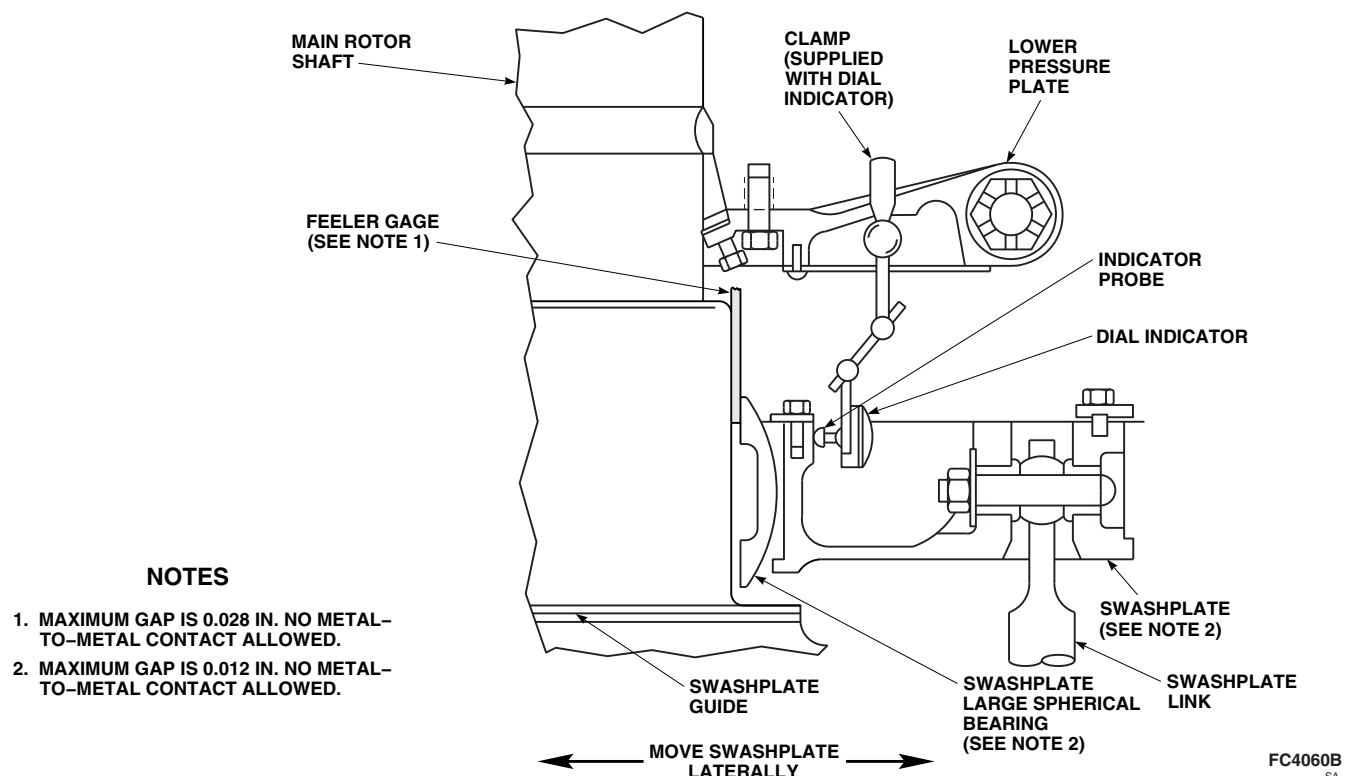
INSPECT SWASHPLATE LARGE SPHERICAL BEARING INNER AND OUTER RACE
